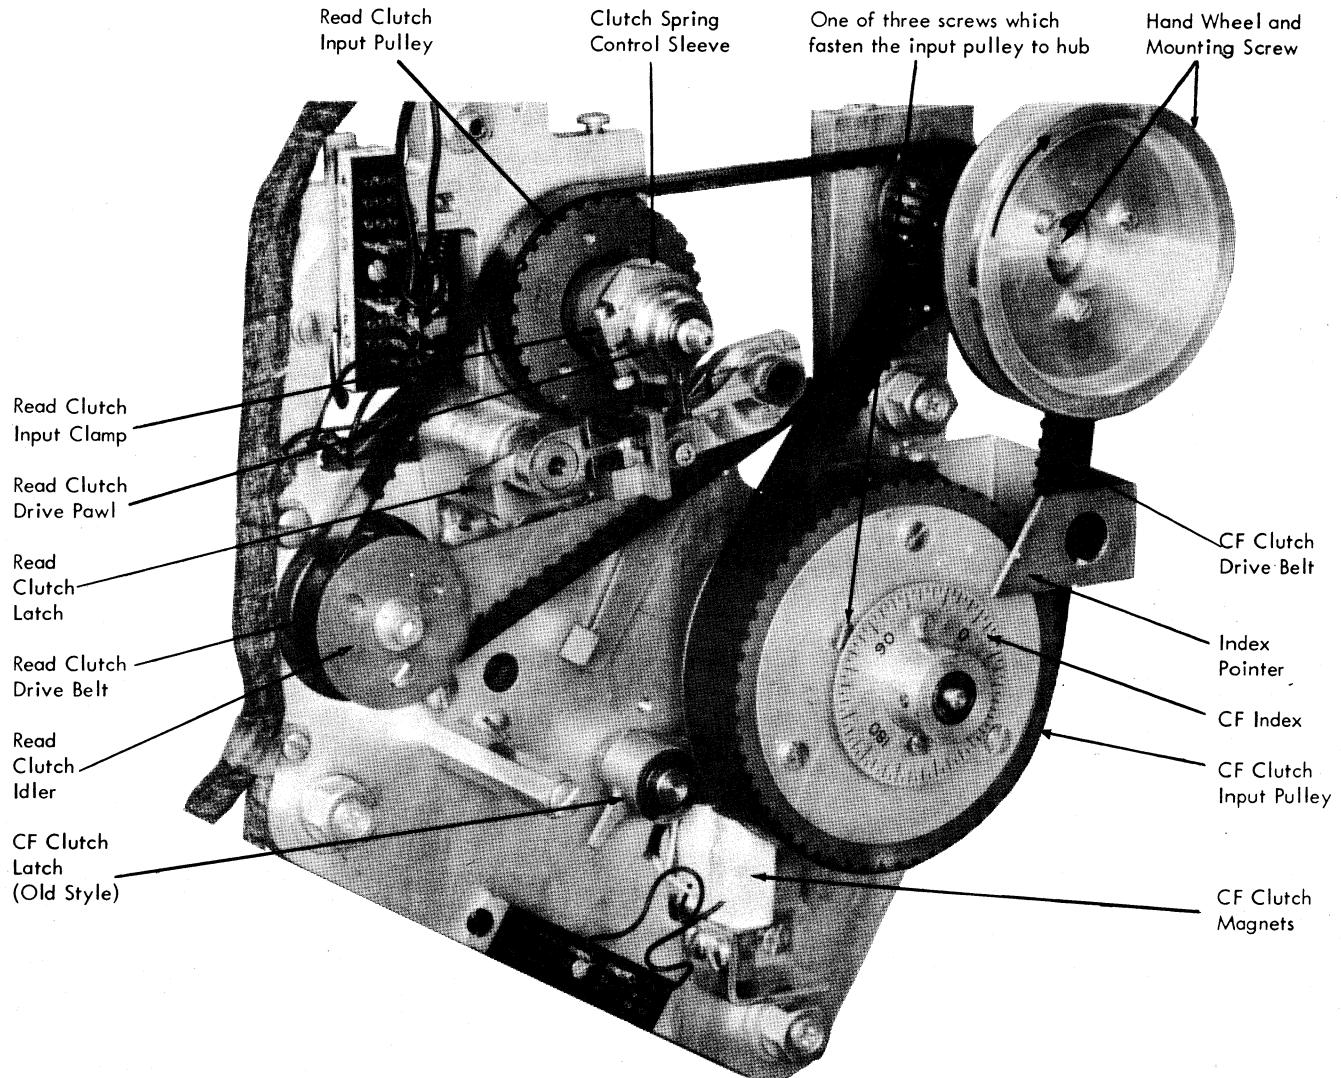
Card Feed Clutch and Read Clutch Removals
